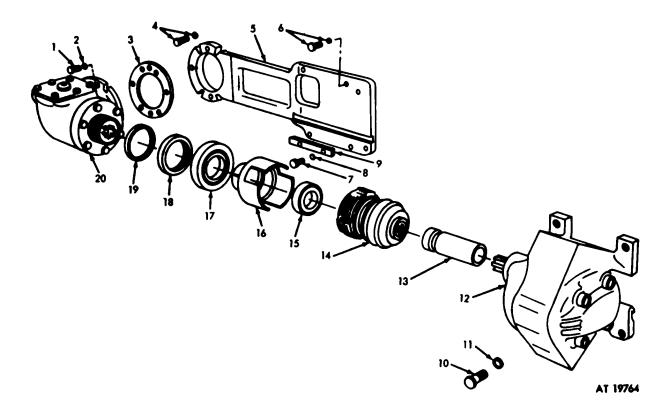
Hydraulic pump and mount assembly - partially exploded view
